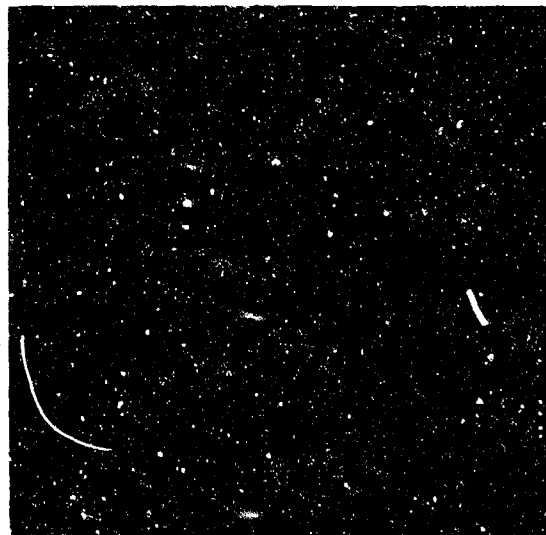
Fractograph Showing a Micro-Void Coalescence Mechanism of Fracture Propagation Characterized by Directional Dimples.
